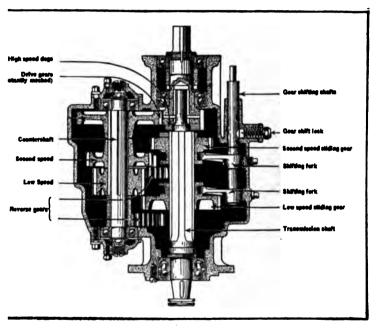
Three Speed Sliding Gearset, Forming Part of Rear Construction of Overland Automobiles.
